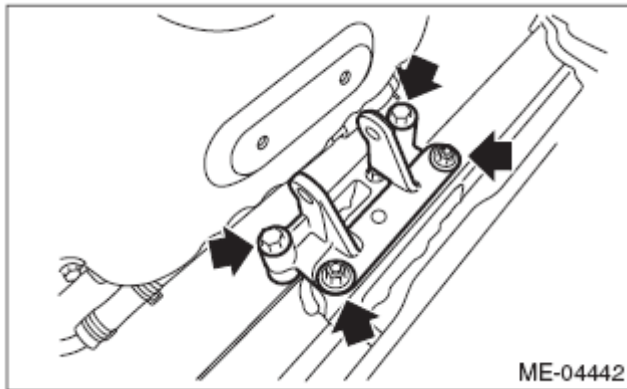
Locating Front Mounting Bracket With Mounting Nuts
